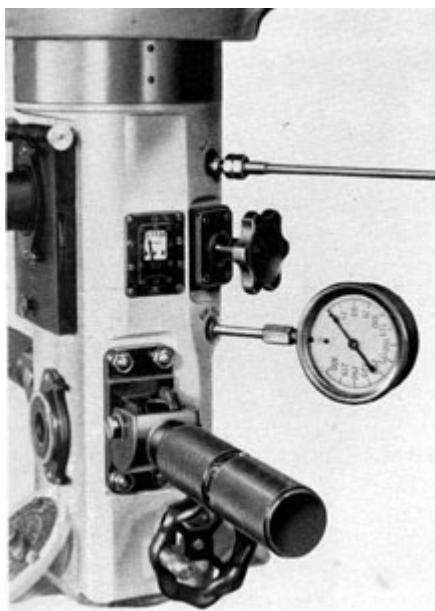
Insertion of nitrogen fitting in inlet connection and pressure gage in outlet connection. Figure 2-16. Opening the air outlet valve with an
